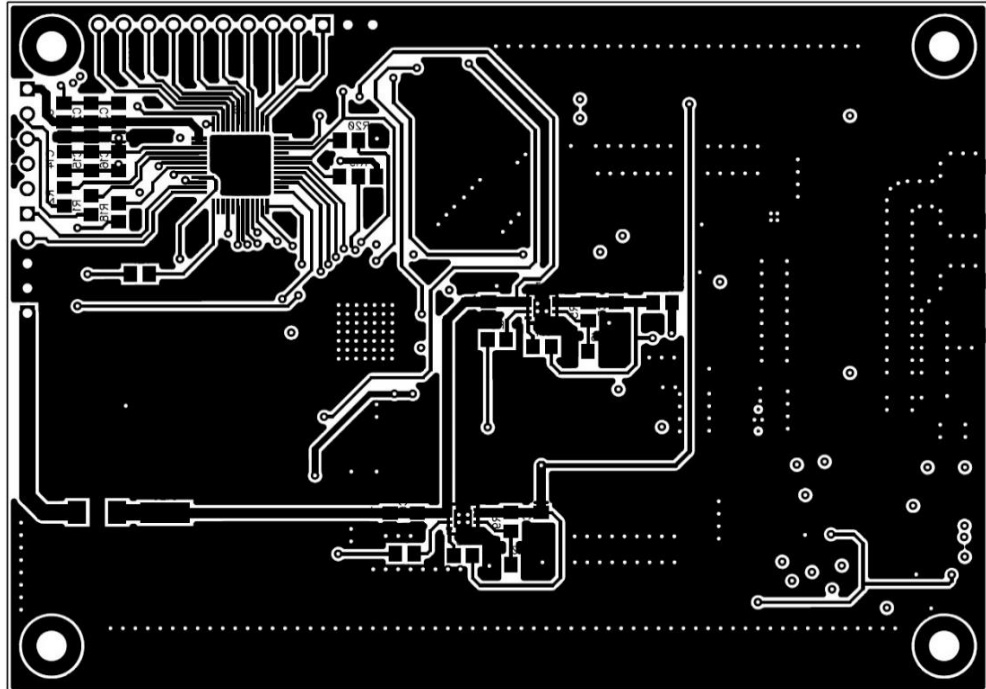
Bottom layer (sixth layer) of the PCB.
